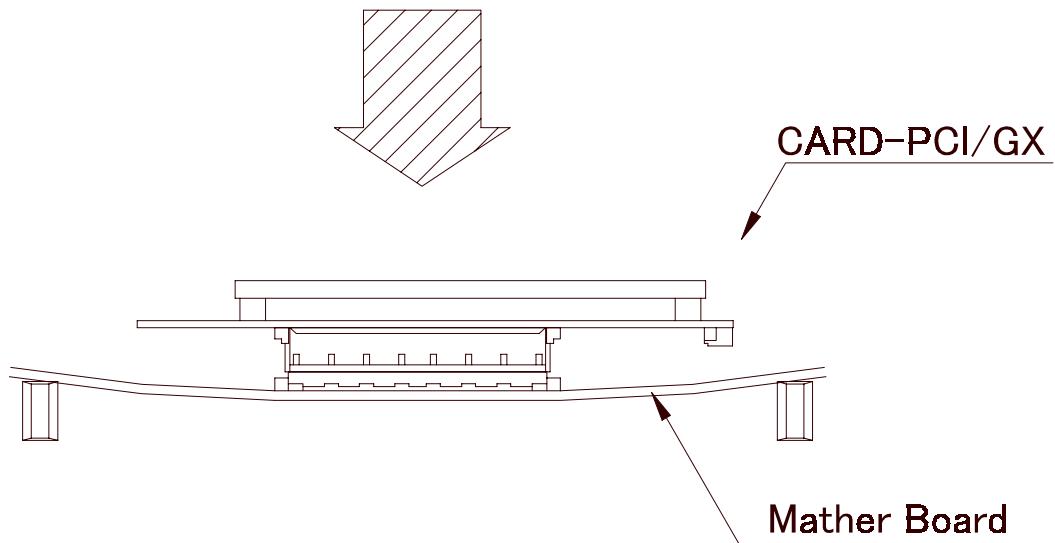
Mother board becoming bended when CARD-PCI/GX is mounted
